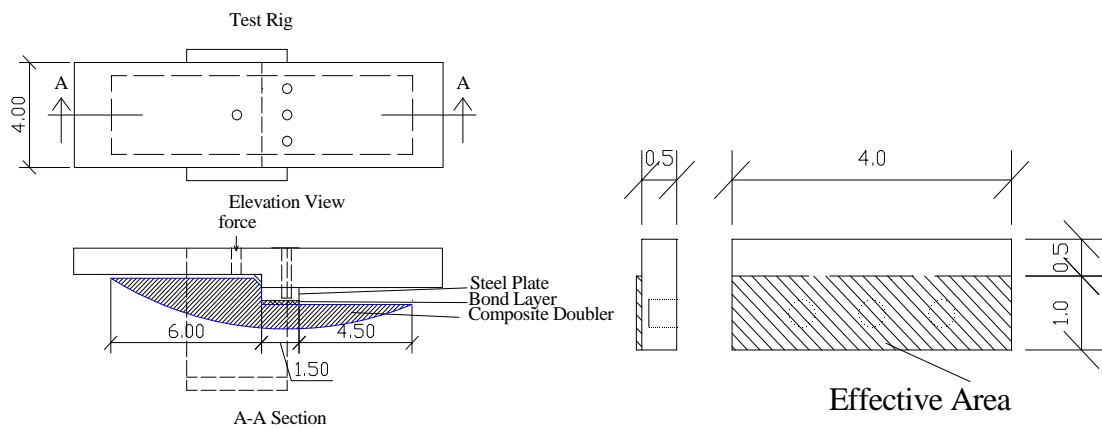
Test Apparatus for Peel Tests (all dimensions in in.
